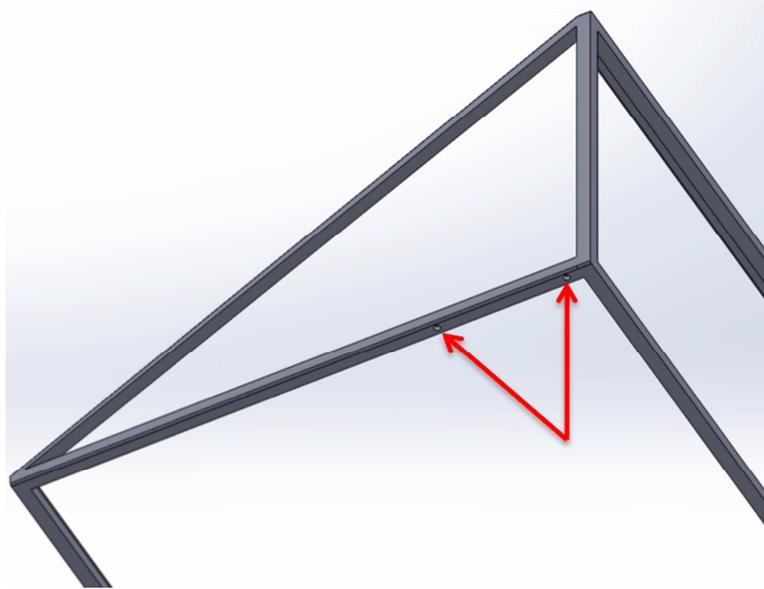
Underneath the solar panel aluminum frame. Four holes will be threaded with two holes on either side of the frame.
